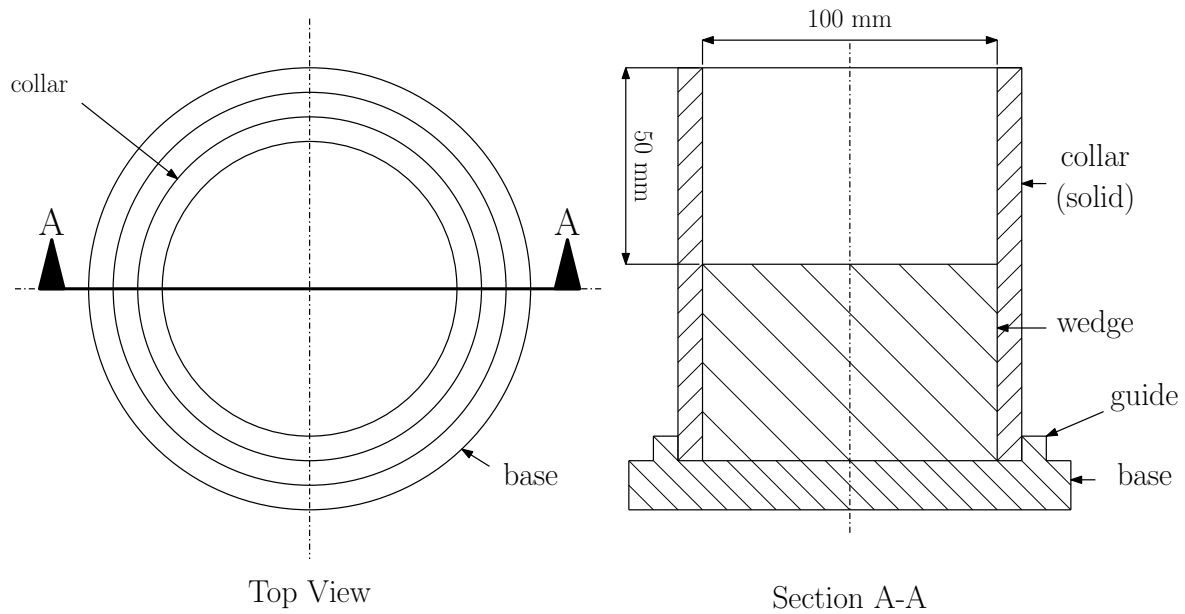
Sketch of the cylindrical mould used for sample production showing principal dimensions
